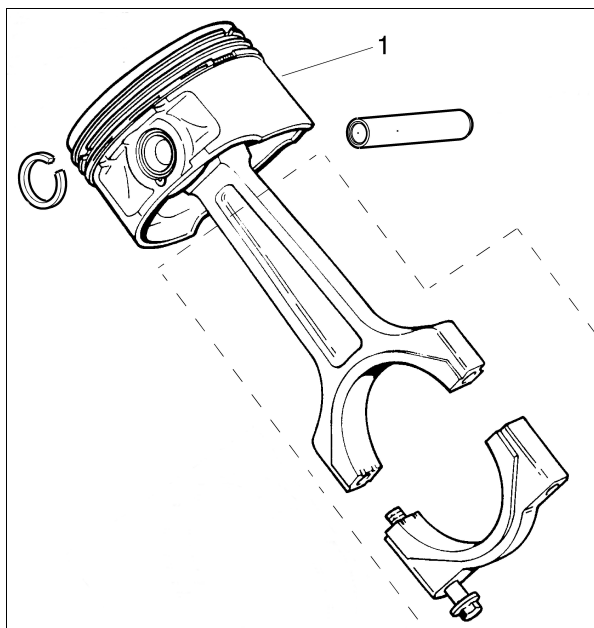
Piston & Connecting rod assembly (S-TYPE)
